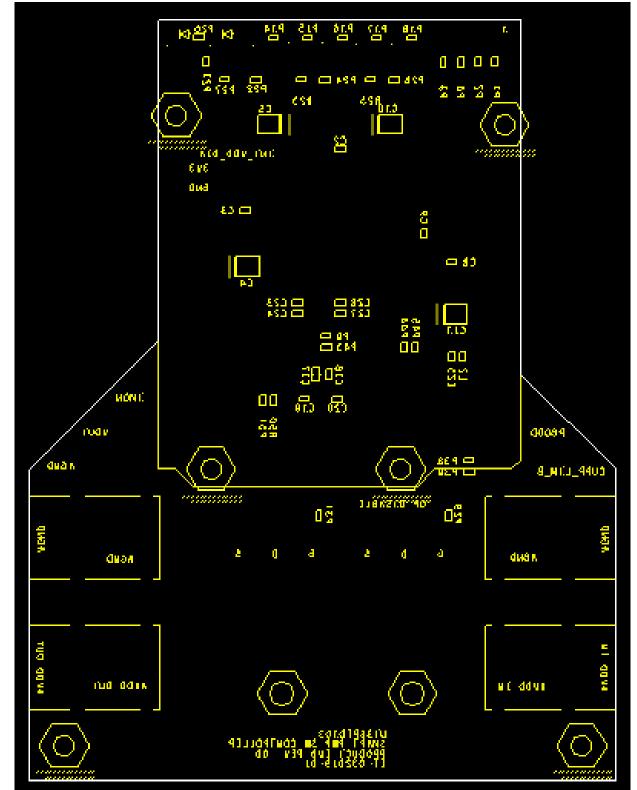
SPSC-EVB-R0 Assembly Bottom View
